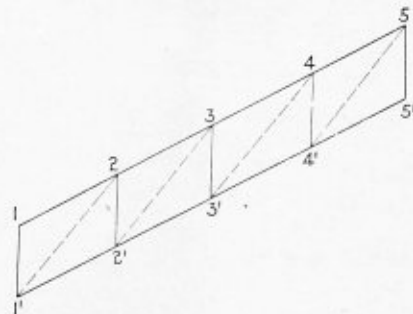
PATTERN FOR INSIDE SHEET OF ELBOW
